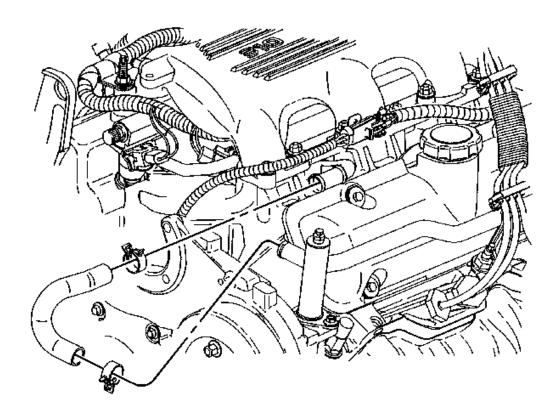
Removing Thermostat Bypass Hose Courtesy of GENERAL MOTORS CORP.
